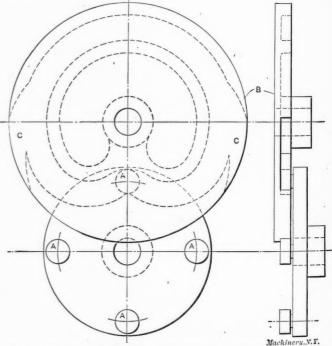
Cam, and Disk with Rollers, by which an Intermittent Movement is imparted to the Driven Shaft.
